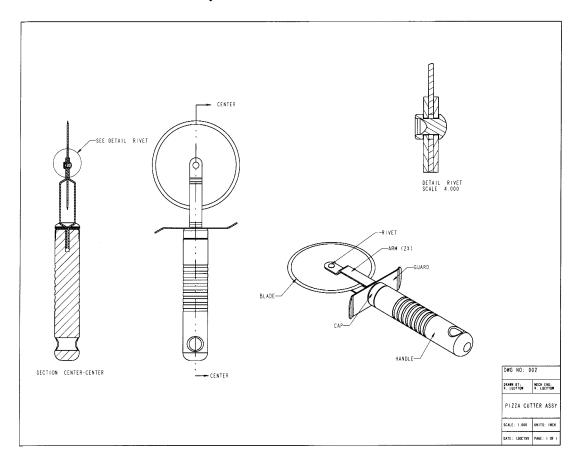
Sectional drawing of pizza cutter (from [2])
